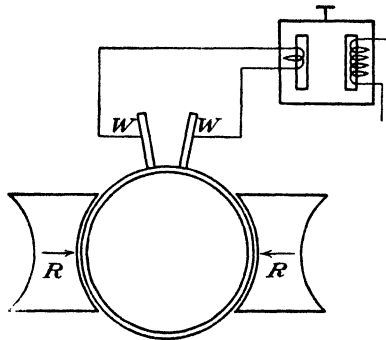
XV.—Sketch showing the method of machine welding pipe by the electrical resistance method. (*From Iron Age.*)
